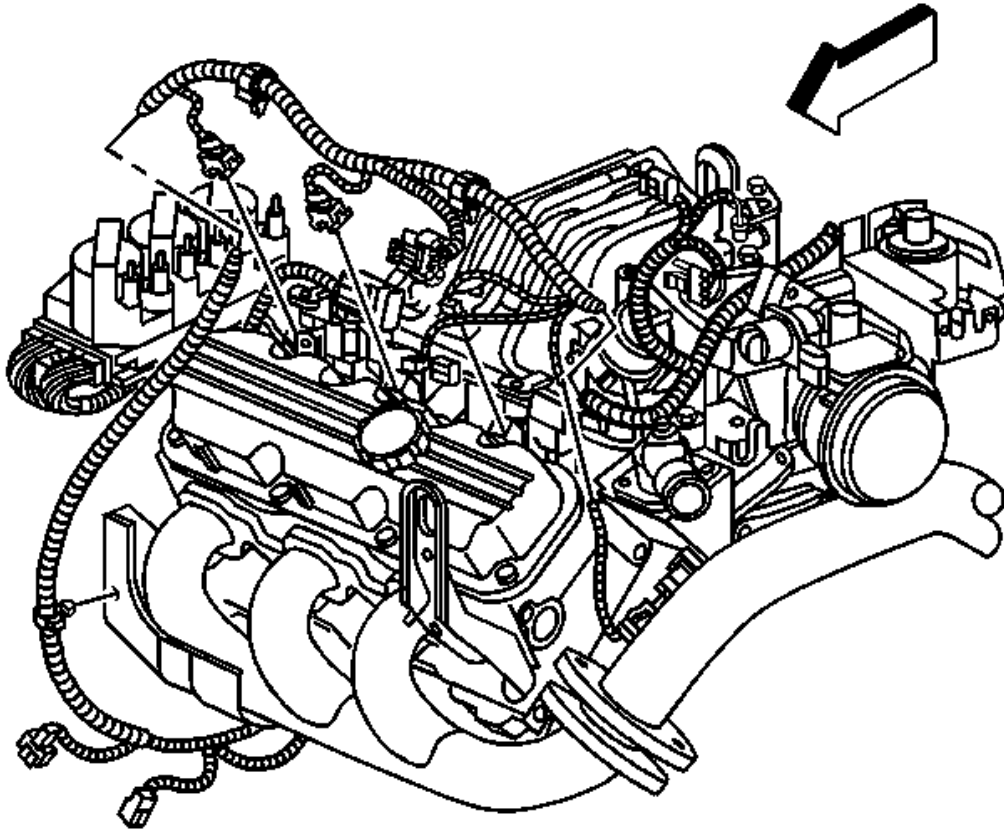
View of Wiring Harness Electrical Connectors on Left Side of Engine Components
